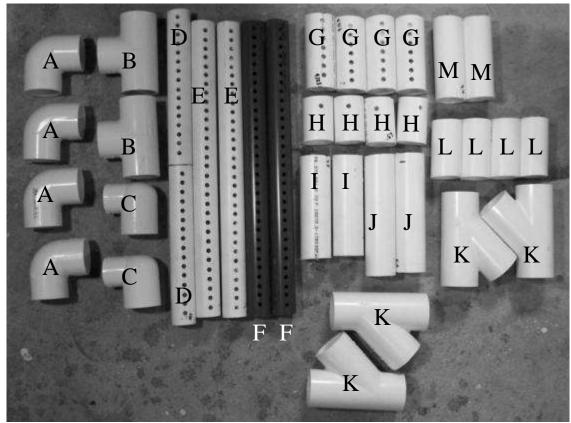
PVC Parts Needed to Assemble the Large Wheelchair Frame.
